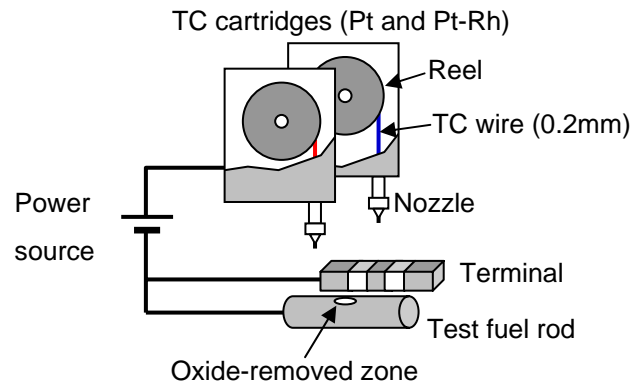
Schematic of spot-welding device for cladding surface thermocouple
